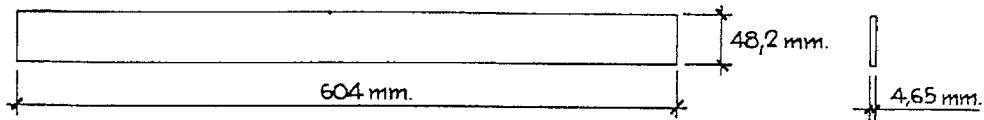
Alternative to fixing tools of upper and lower steel plates (dimensions in mm).
